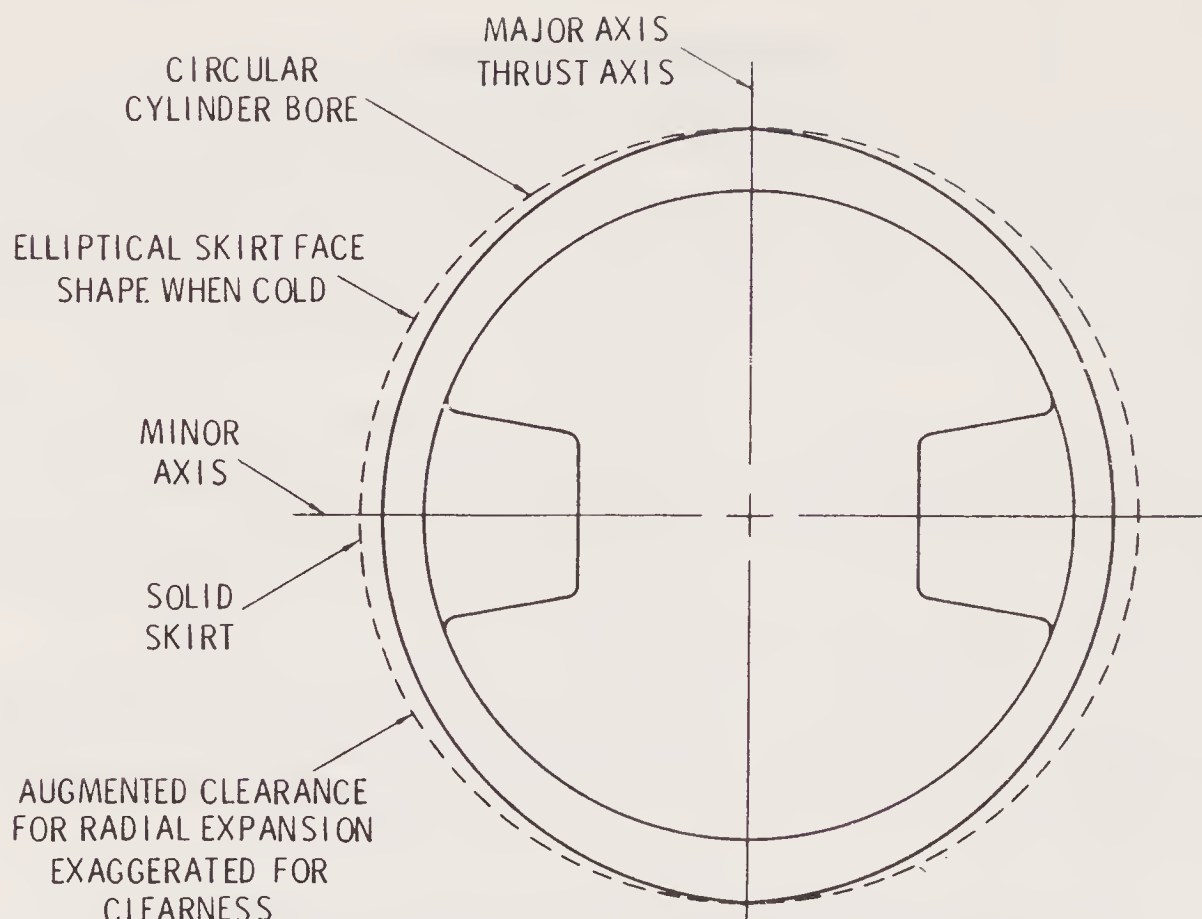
Bottom view of piston illustrating cam grinding.
